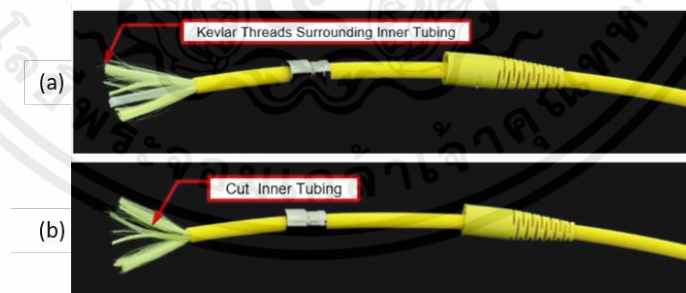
The furcation tubing. (a) The furcation tubing after stripping 13 mm of the outer tube. (b) The inner tube is trimmed close to the length of the outer furcation tube
